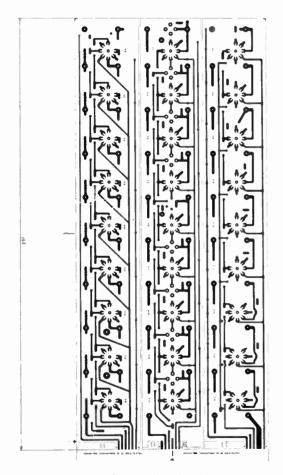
Example of printed wiring layout master showing registration marks and processing instructions.
